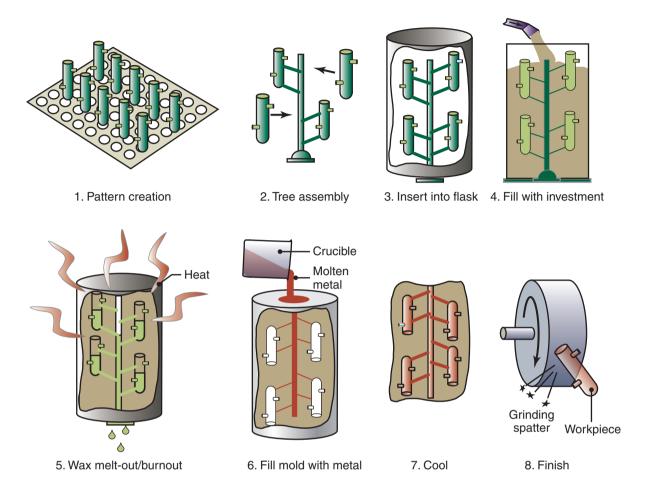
Manufacturing steps for investment casting with rapid-prototyped wax parts as blanks. This method uses a flask for the investment, but a shell method also can be used. *Source:* Courtesy of 3D Systems, Inc.
